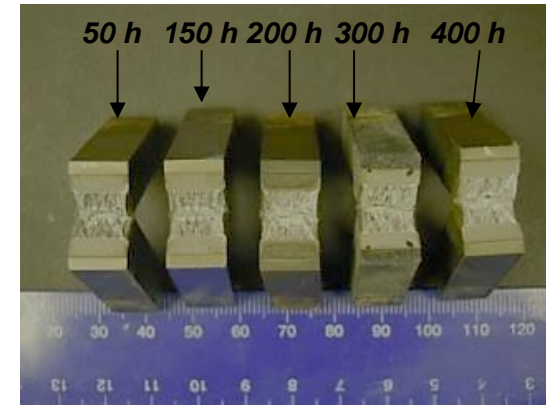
Fracture surface of samples obtained at low magnification on virgin PCCVN samples
